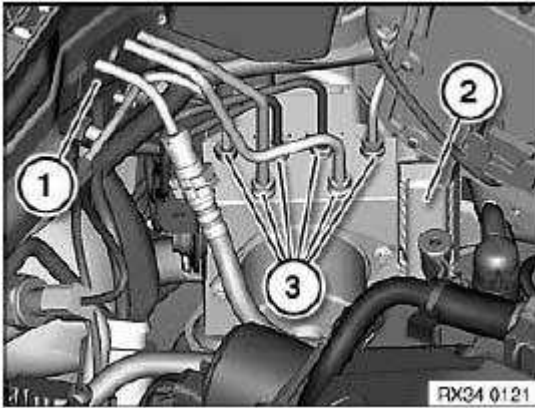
Identifying Line Holder, Plug Connection And Brake Lines
